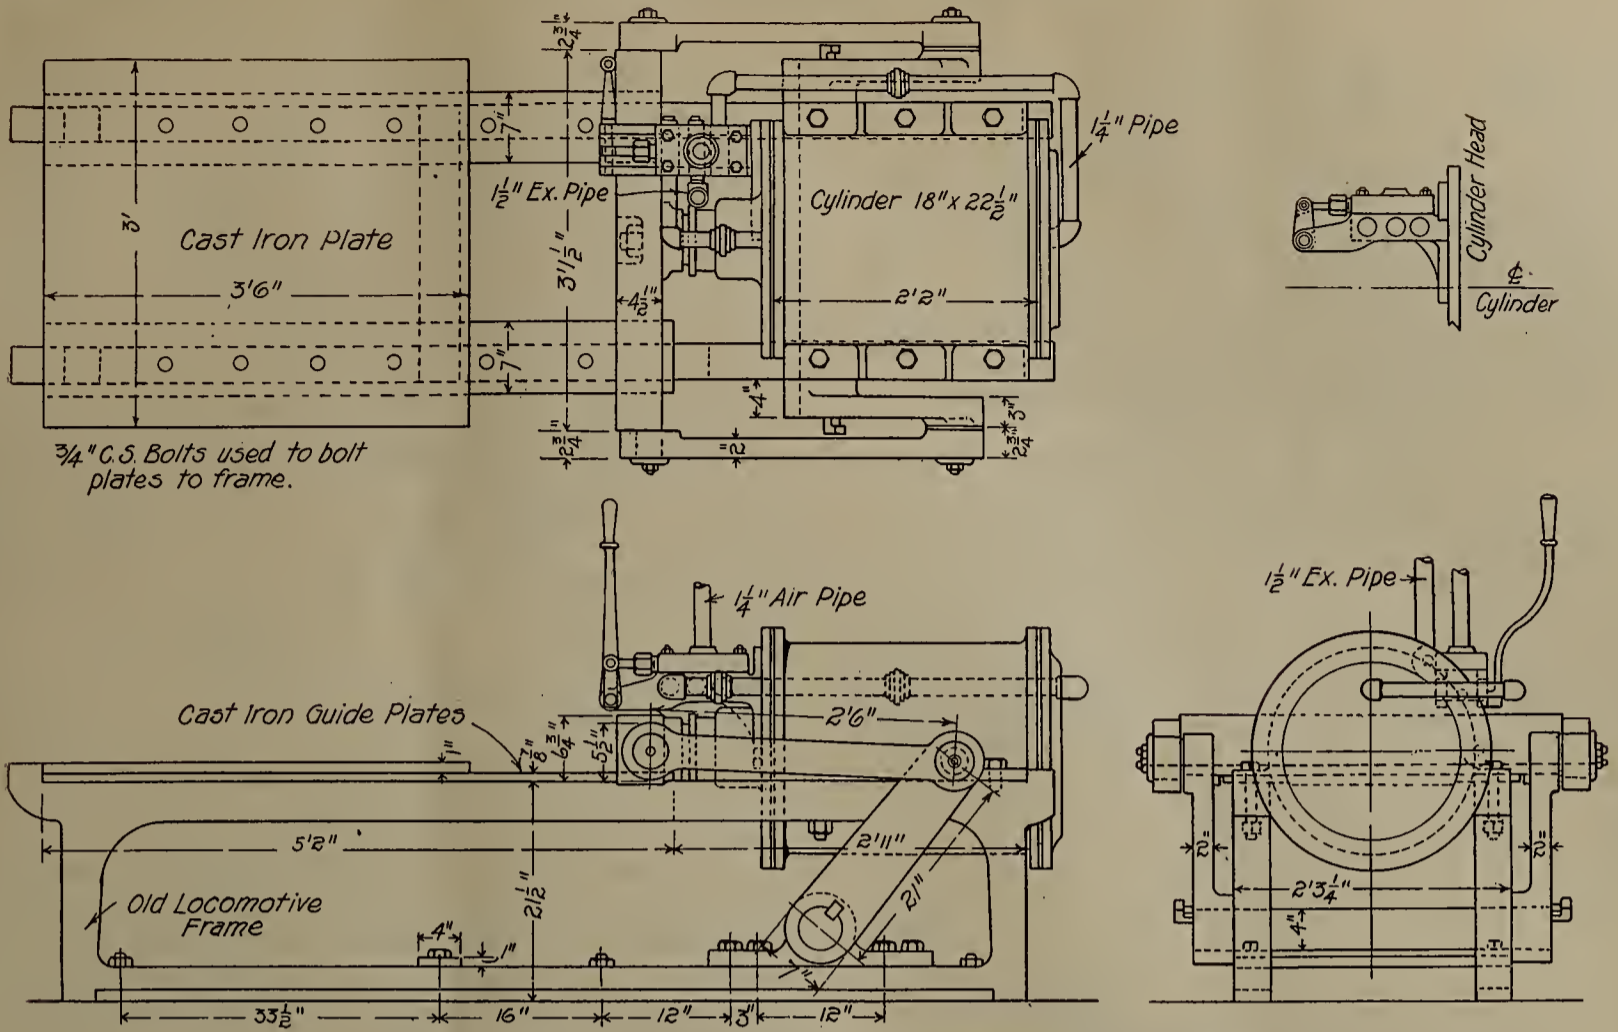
Powerful Pneumatic Bending Machine, Beech Grove Shops.
